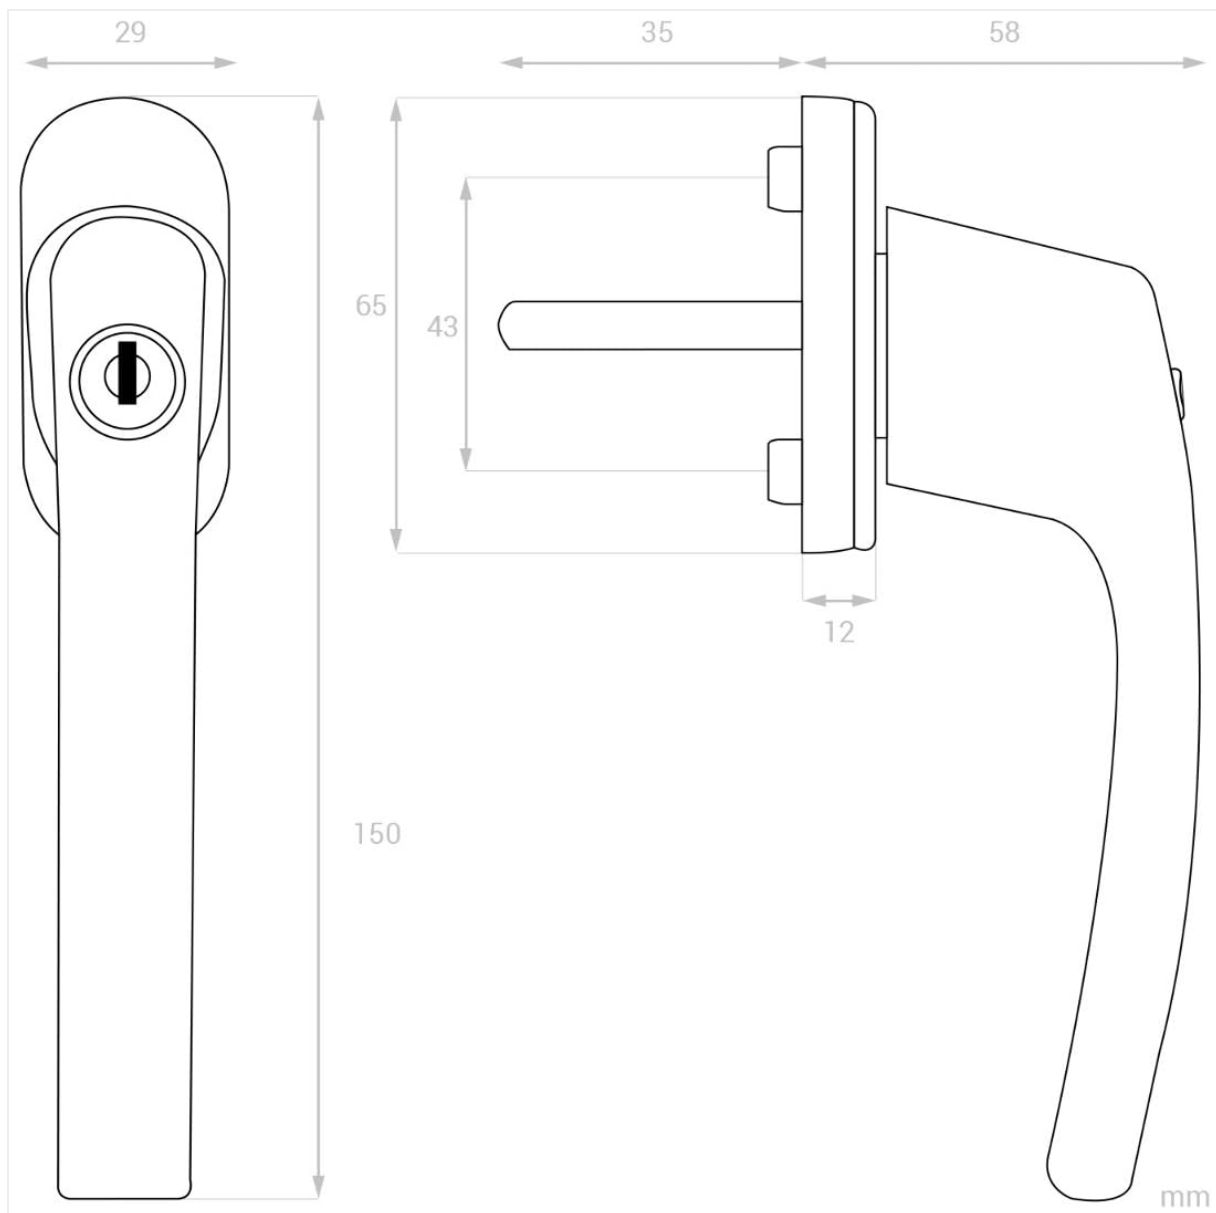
Dimensional drawing of the kwmobile window handle. Note the 35mm spindle length and 43mm screw spacing for compatibility.
